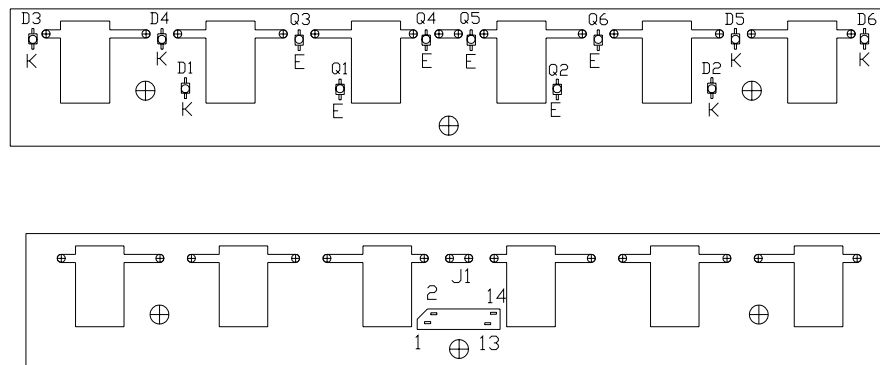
Sensor Board and Optical Fibre (component and soldered layout)
